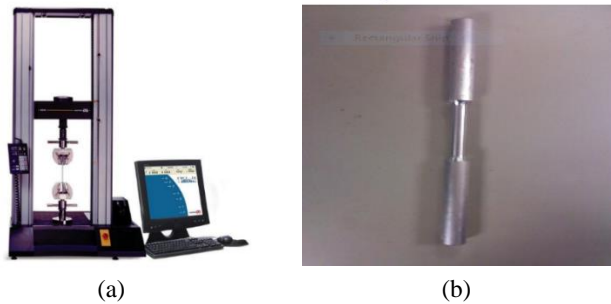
(a) and (b) represents a typical Instron load frame and reduced gauge section specimen
